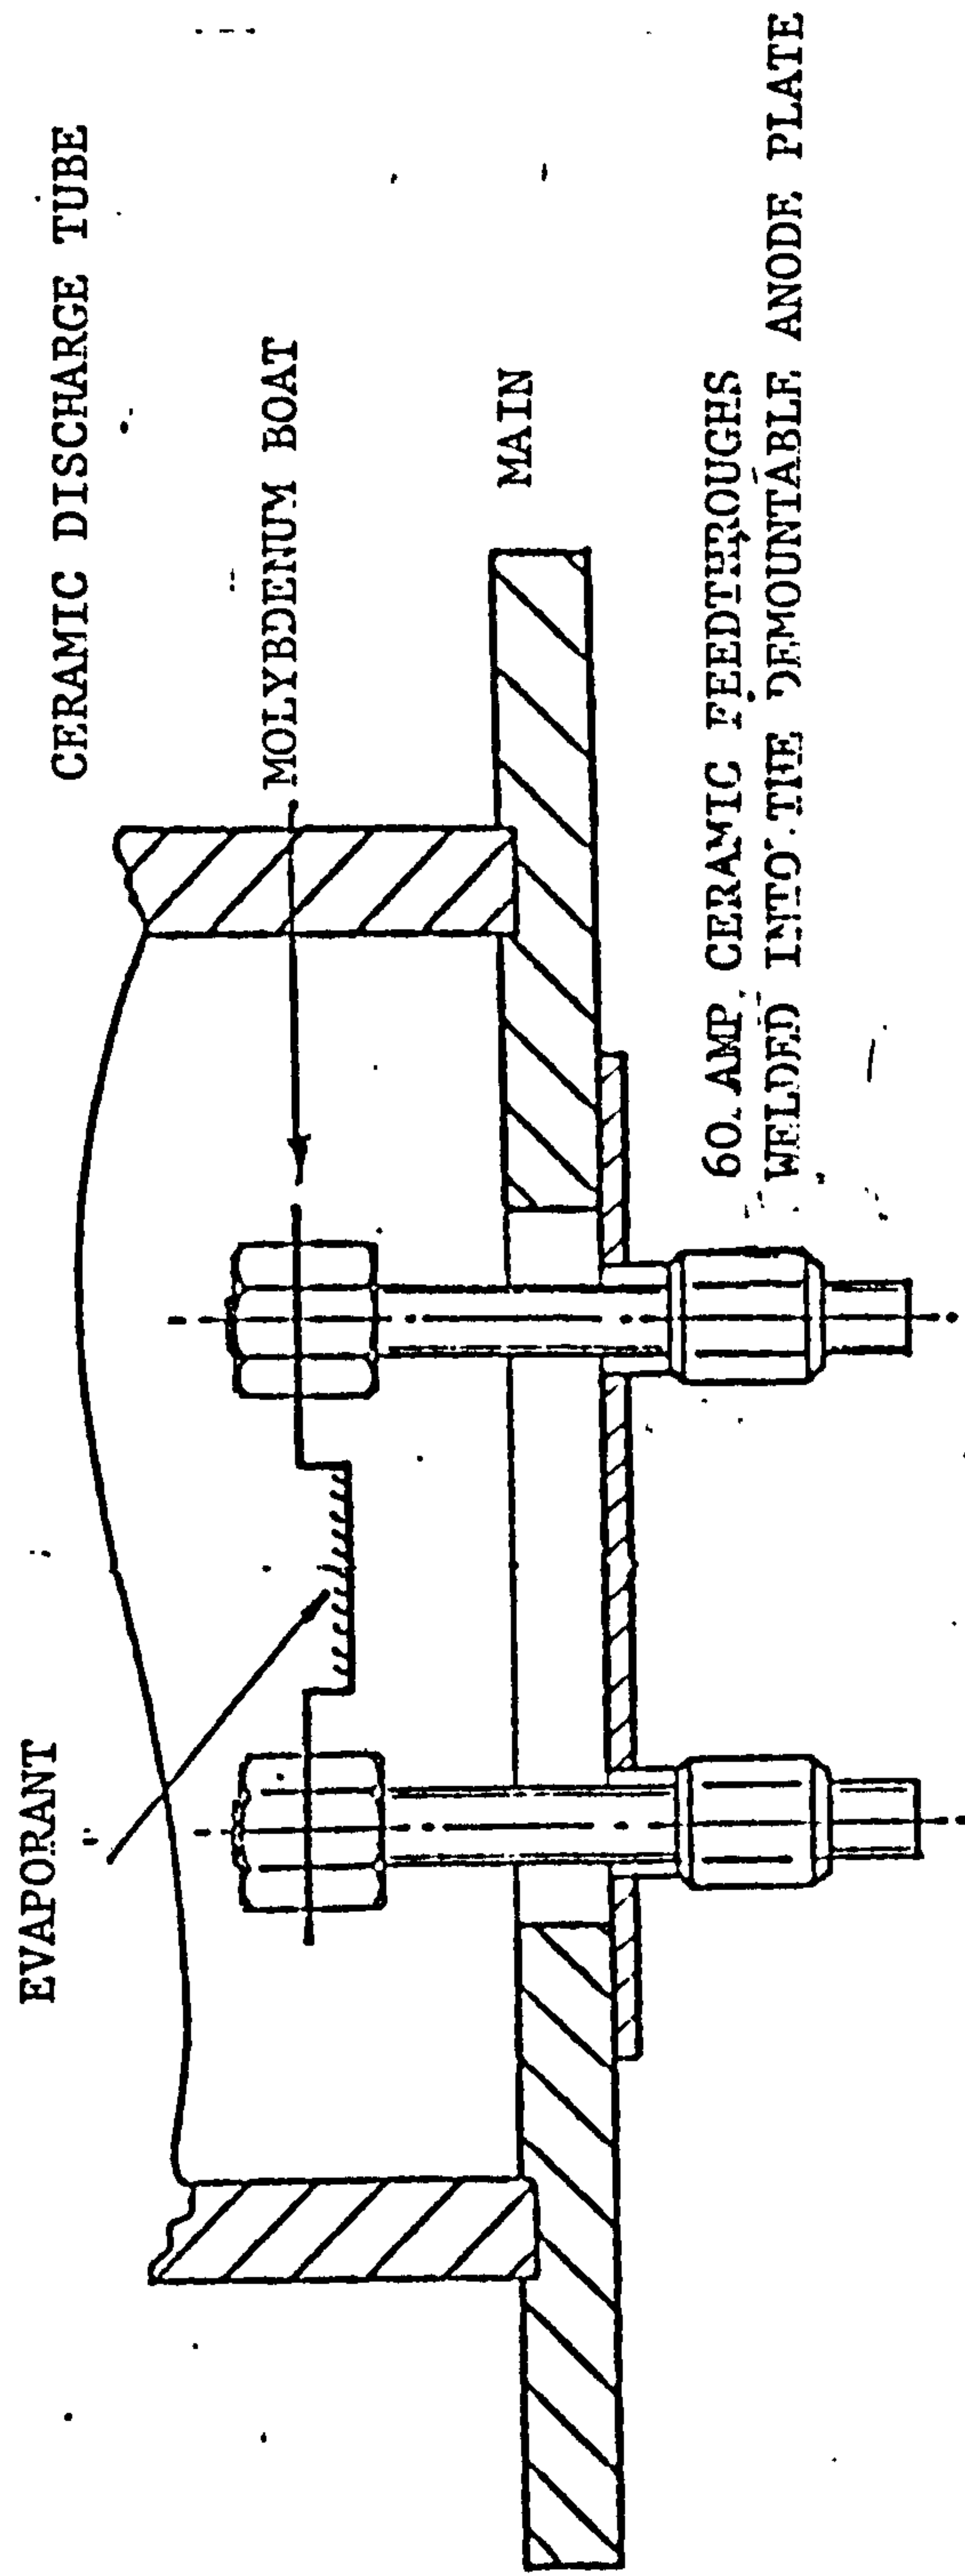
BOAT EVAPORATOR MOUNTED INSIDE THE DISCHARGE TUBE
